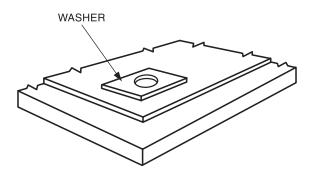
C—Typical Weld Washer (see 2.3.5.3)
